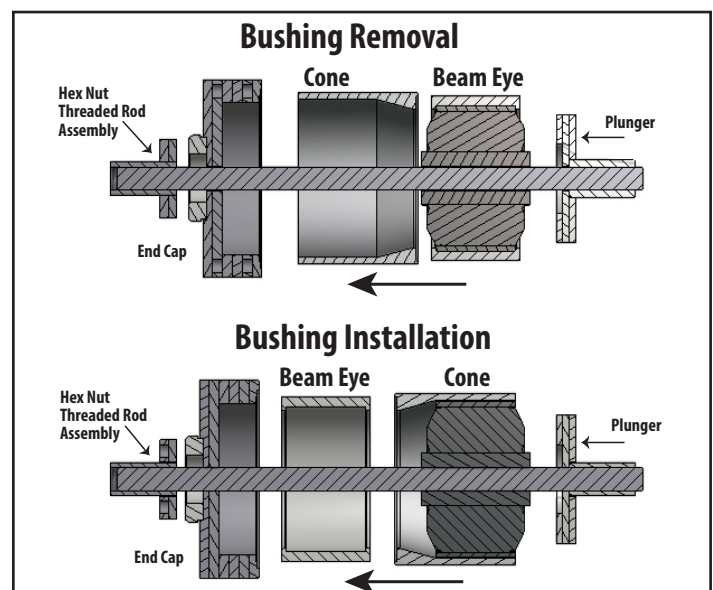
Bushing Replacement Tool 6100044 is for RAR-266 suspensions with narrow bushing.
